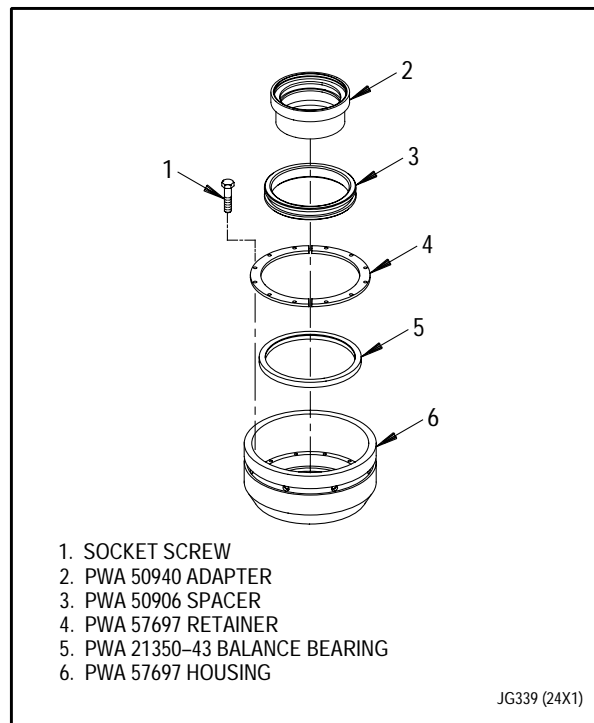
Rear Compressor Rotor Assembly Front Hub Balance Bearing - Assembly
